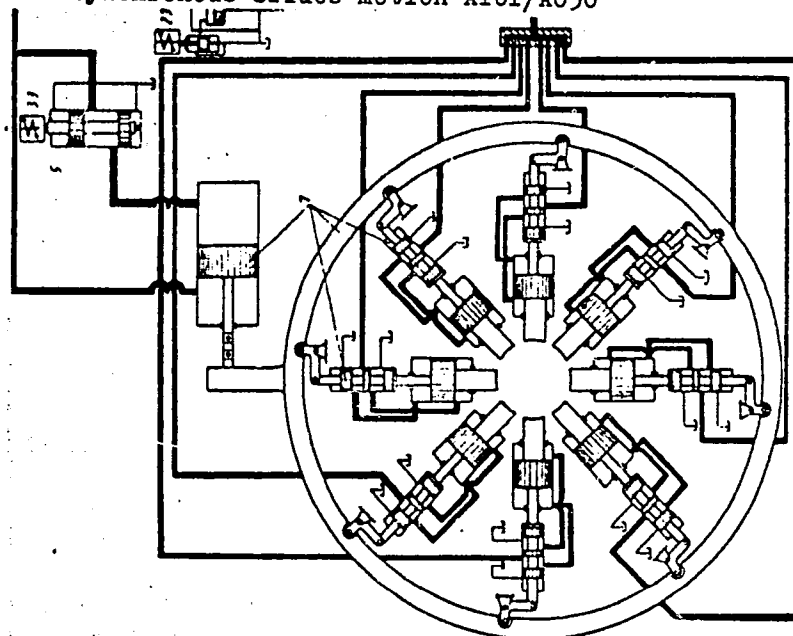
The hydraulic circuit. 1 - The NPM-100 piston pump with electric control; 2 - the N-400 piston pump; 3 - safety valve with 1 KPM-25 (1KRM-25) by-pass slide valve; 4 - safety valve with 1KP-15 (KR-15) by-pass slide valve; 5 - four-way slide valve controlled from electromagnet; 6 - laminated filter; 7 - tracing slide valve.
